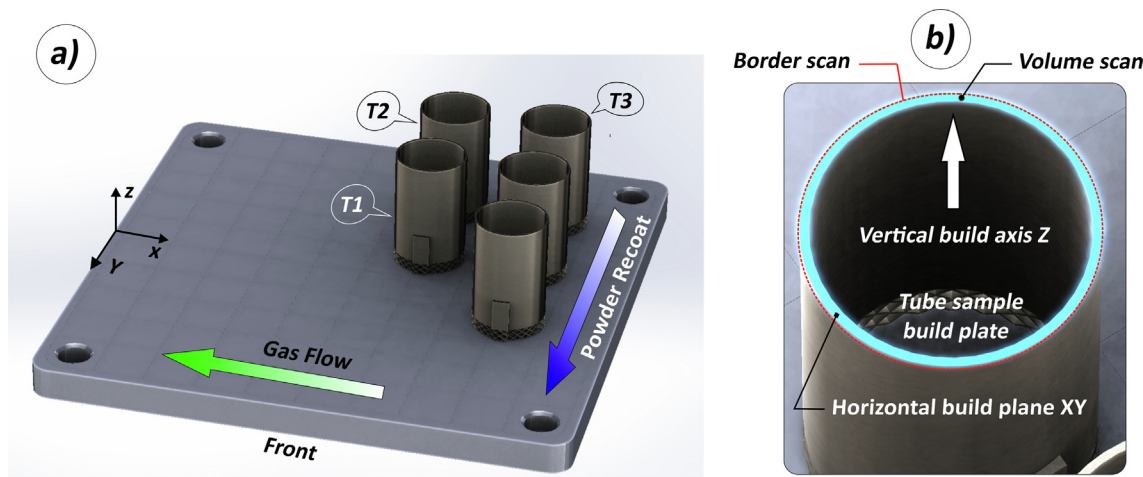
Additive manufacturing (AM) of tube samples, T1, T2 and T3, using the Renishaw AM250 SLM machine (a) and tube sample build orientation definitions (b).
